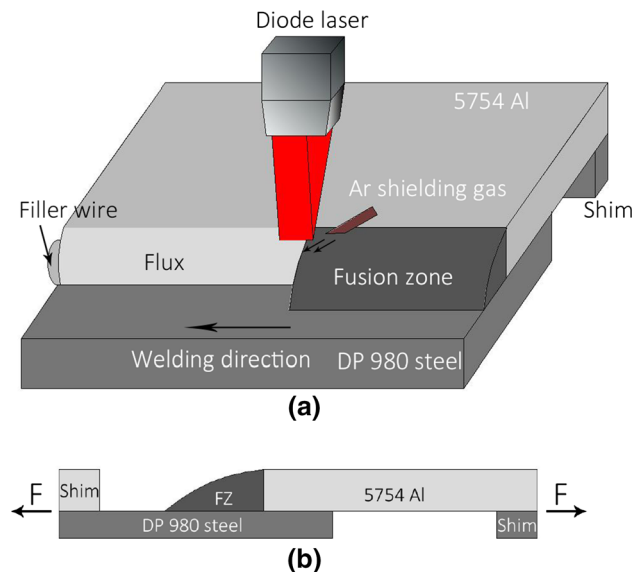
(a) Schematic description of the laser welding/brazing layout used for joining the aluminum alloy to steel sheets in the lap joint configuration and (b) schematic illustration of the tensile-shear test samples.
